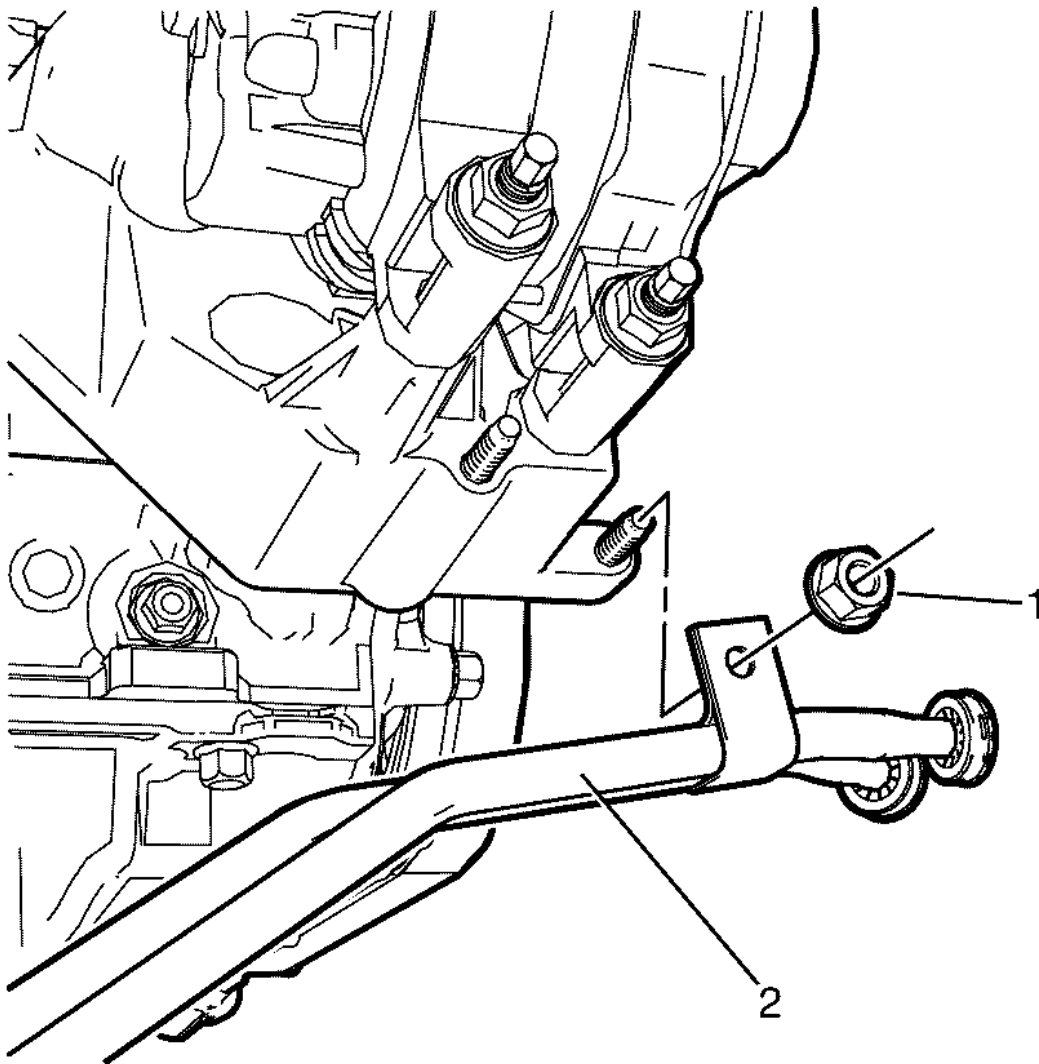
Identifying A/T Cooler Pipe Clamp To A/C Bracket Nut
